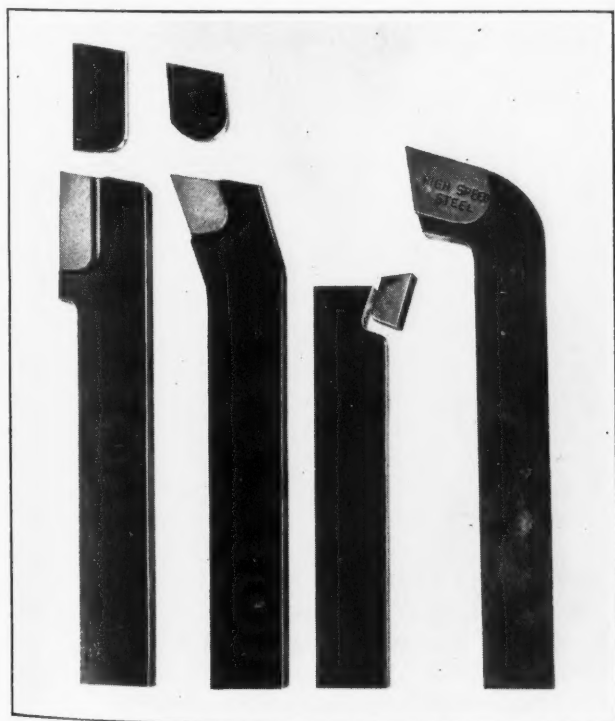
Three Forged Tool Shanks with Tips to be Welded on and One Tool with Tip Welded in Place
